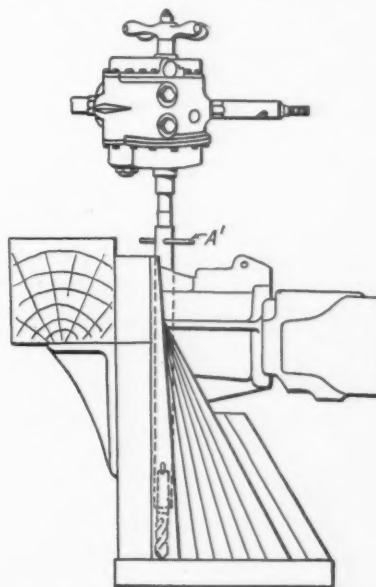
Using the Drill Extension in Drilling a Pilot Hole Plate
